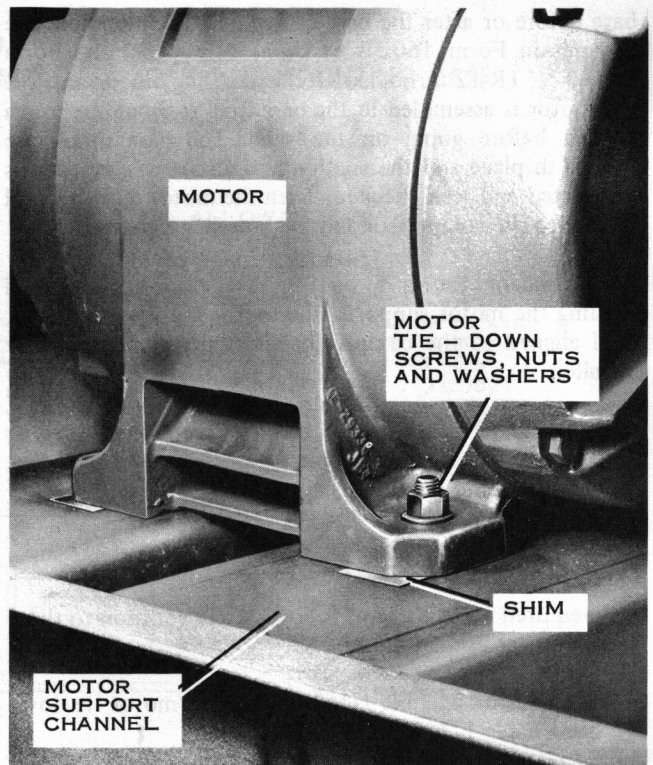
INSTALLATION OF MOTOR TO MOTOR SUPPORT
